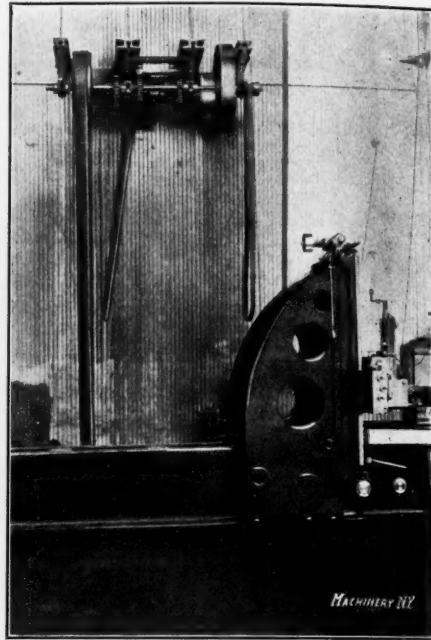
Planer equipped with a Lodge & Shipley Variable-speed Lathe Countershaft
